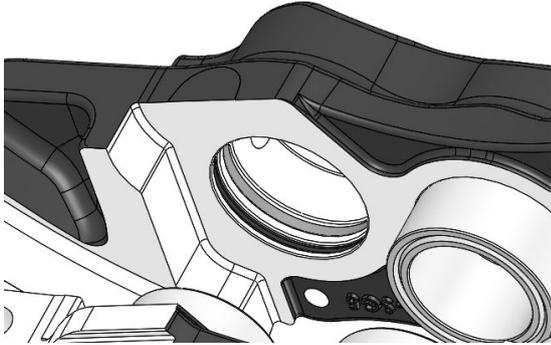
Caliper pistons moved forward to facilitate removal
